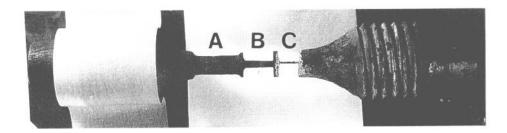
Three electrolytically machined gauge lengths of different diameter on a single sample.
